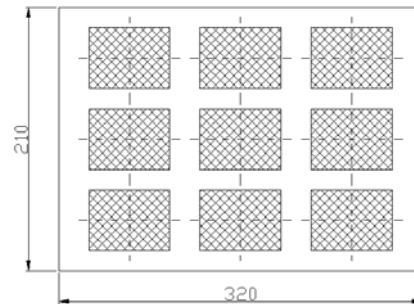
Plate with surface bonded collocated patches (dimensions in mm)
